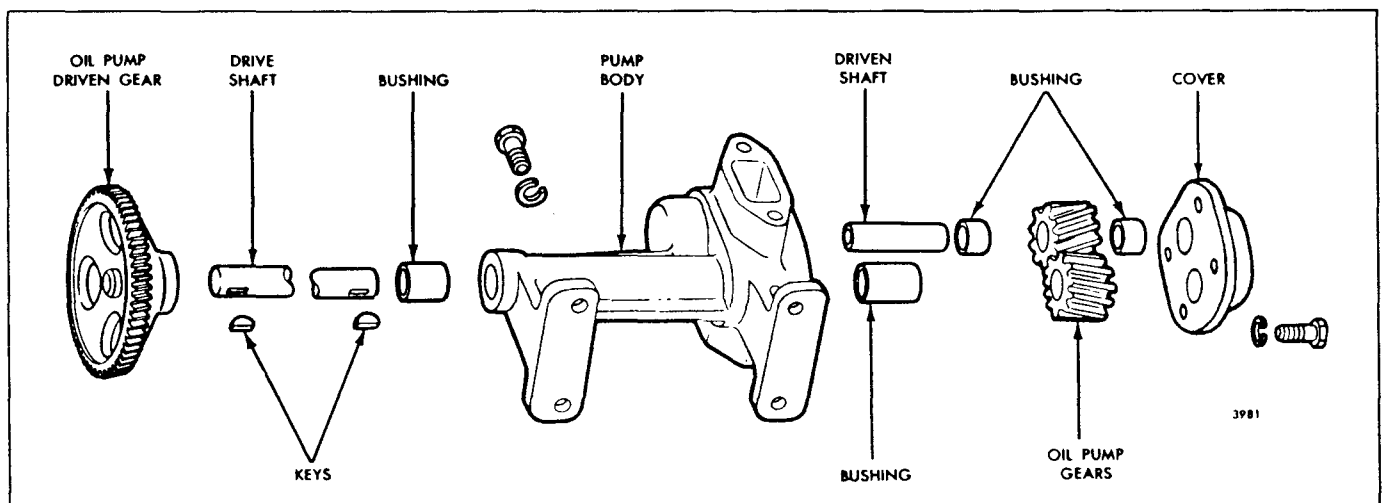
Lubricating Oil Pump Details and Relative Location of Parts (8V Engine)
